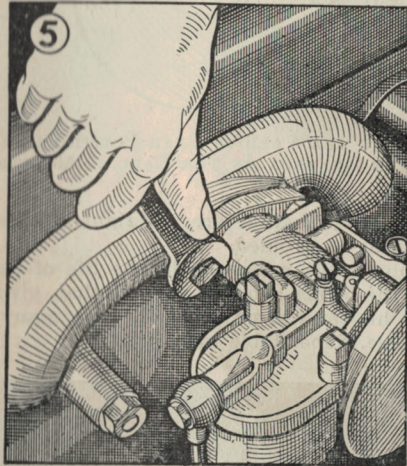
TIGHTENING THE CARBURETTOR TO MANIFOLD NUTS
